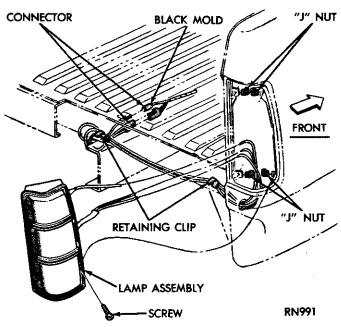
Tail, Stop, Turn Signal, Rear Side Marker and Back-Up Lamp
